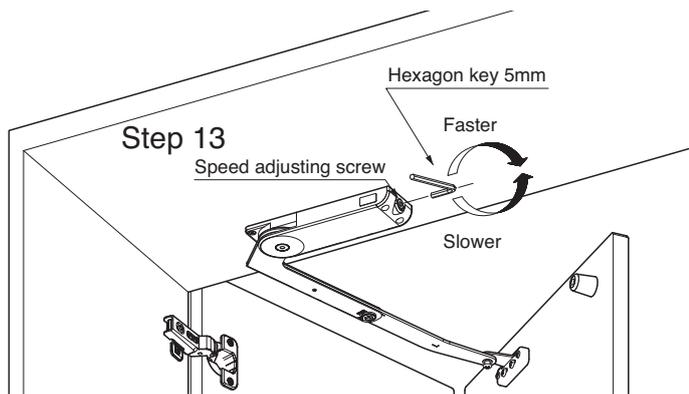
Adjustment of door opening and closing speed (for right-hand side)
